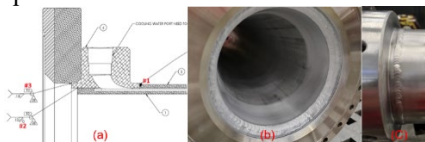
(a) the welding design at injection side, (b) and (c): photos of the actual welding joints.
